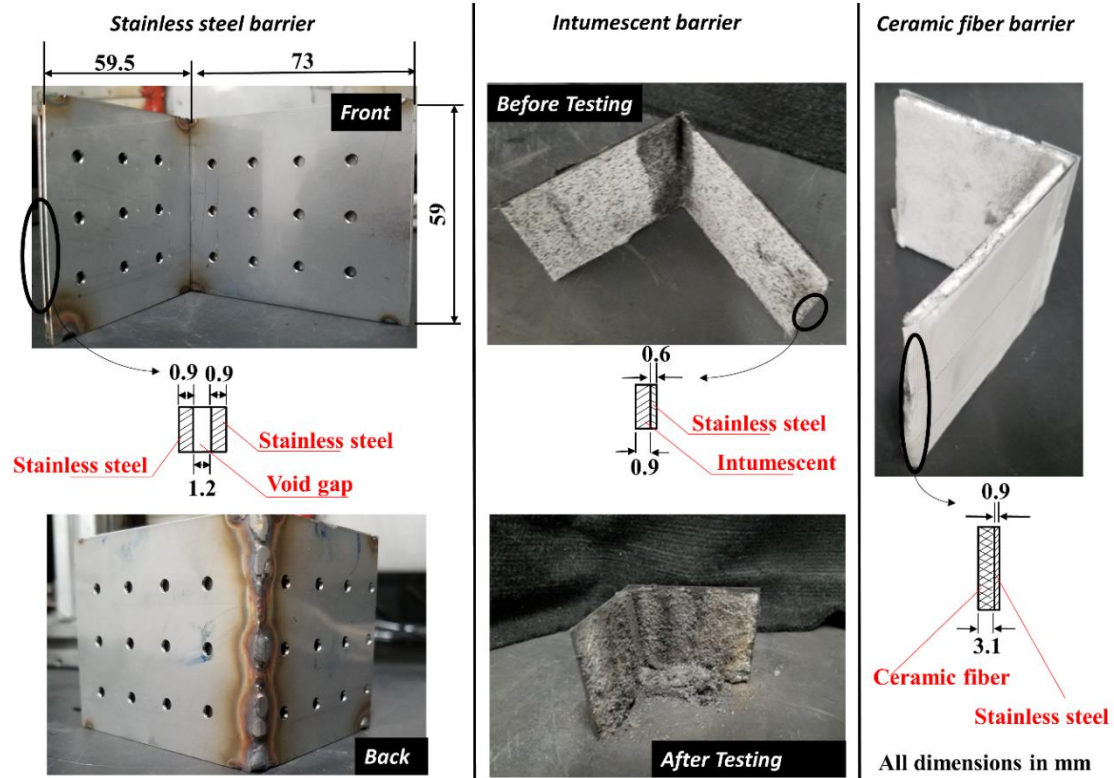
5. Dimensioned schematics of the tested physical barrier assemblies.
